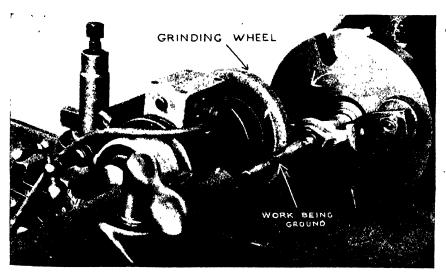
USING ATTACHMENT FOR PLAIN CYLINDRICAL GRINDING
